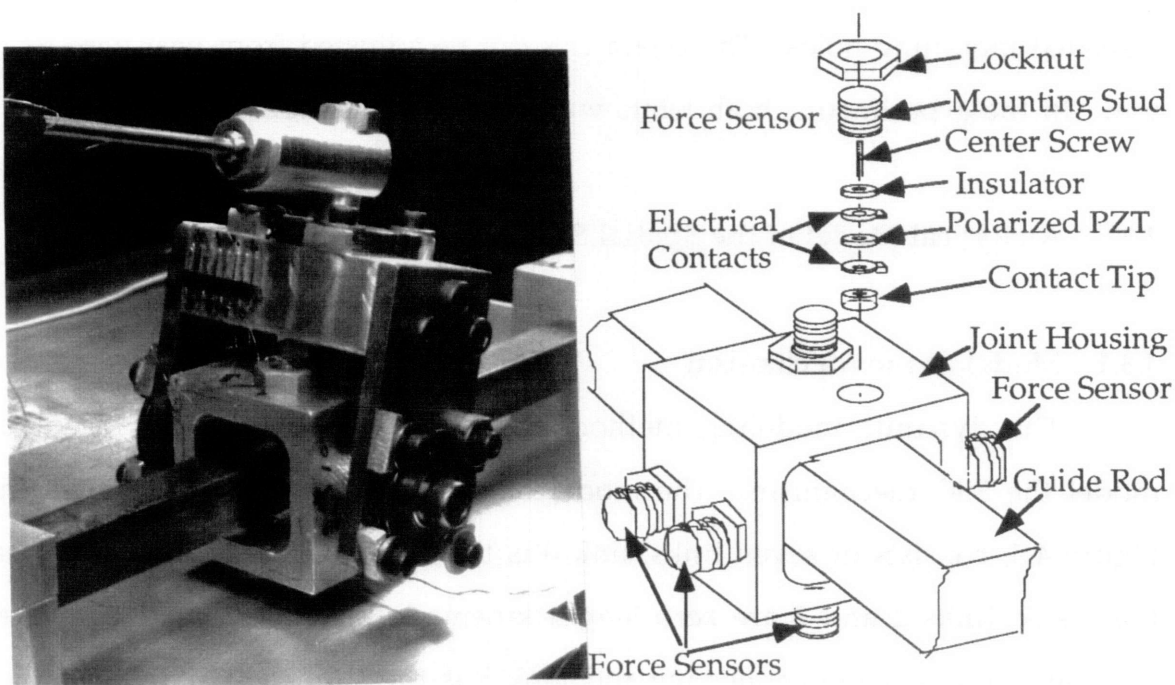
(a) Instrumented, adjustable clearance slider joint
